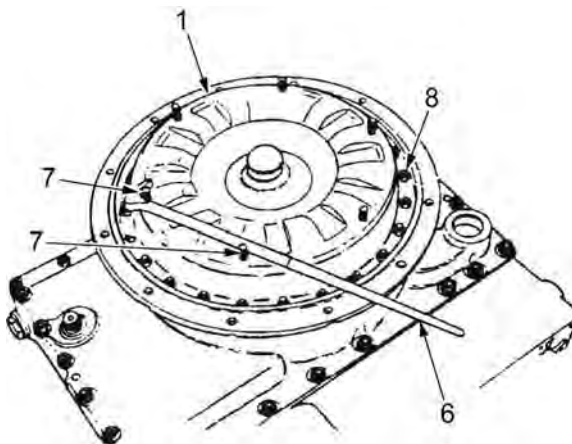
Converter Pump Cover Assembly Hardware Removal.
